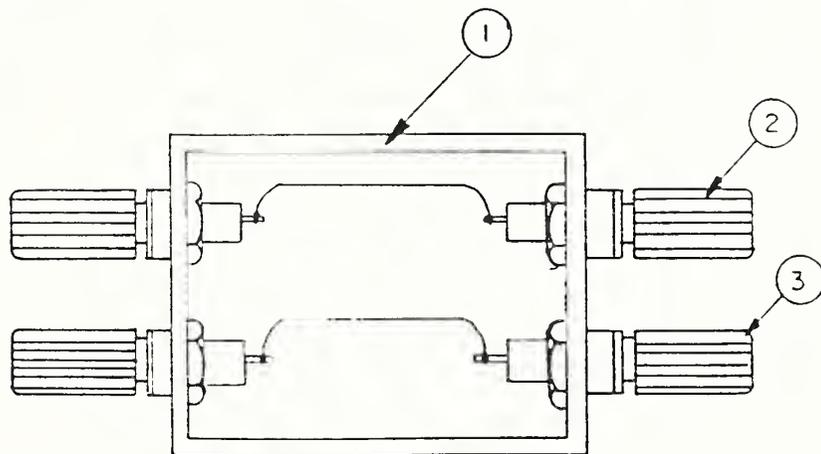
Binding Post to Binding Post Adapter, Assembly Drawing
